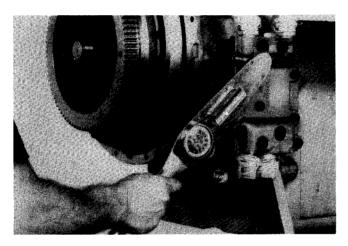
Install control valve bolts and washers and tighten to specified torque. (See torque chart).
